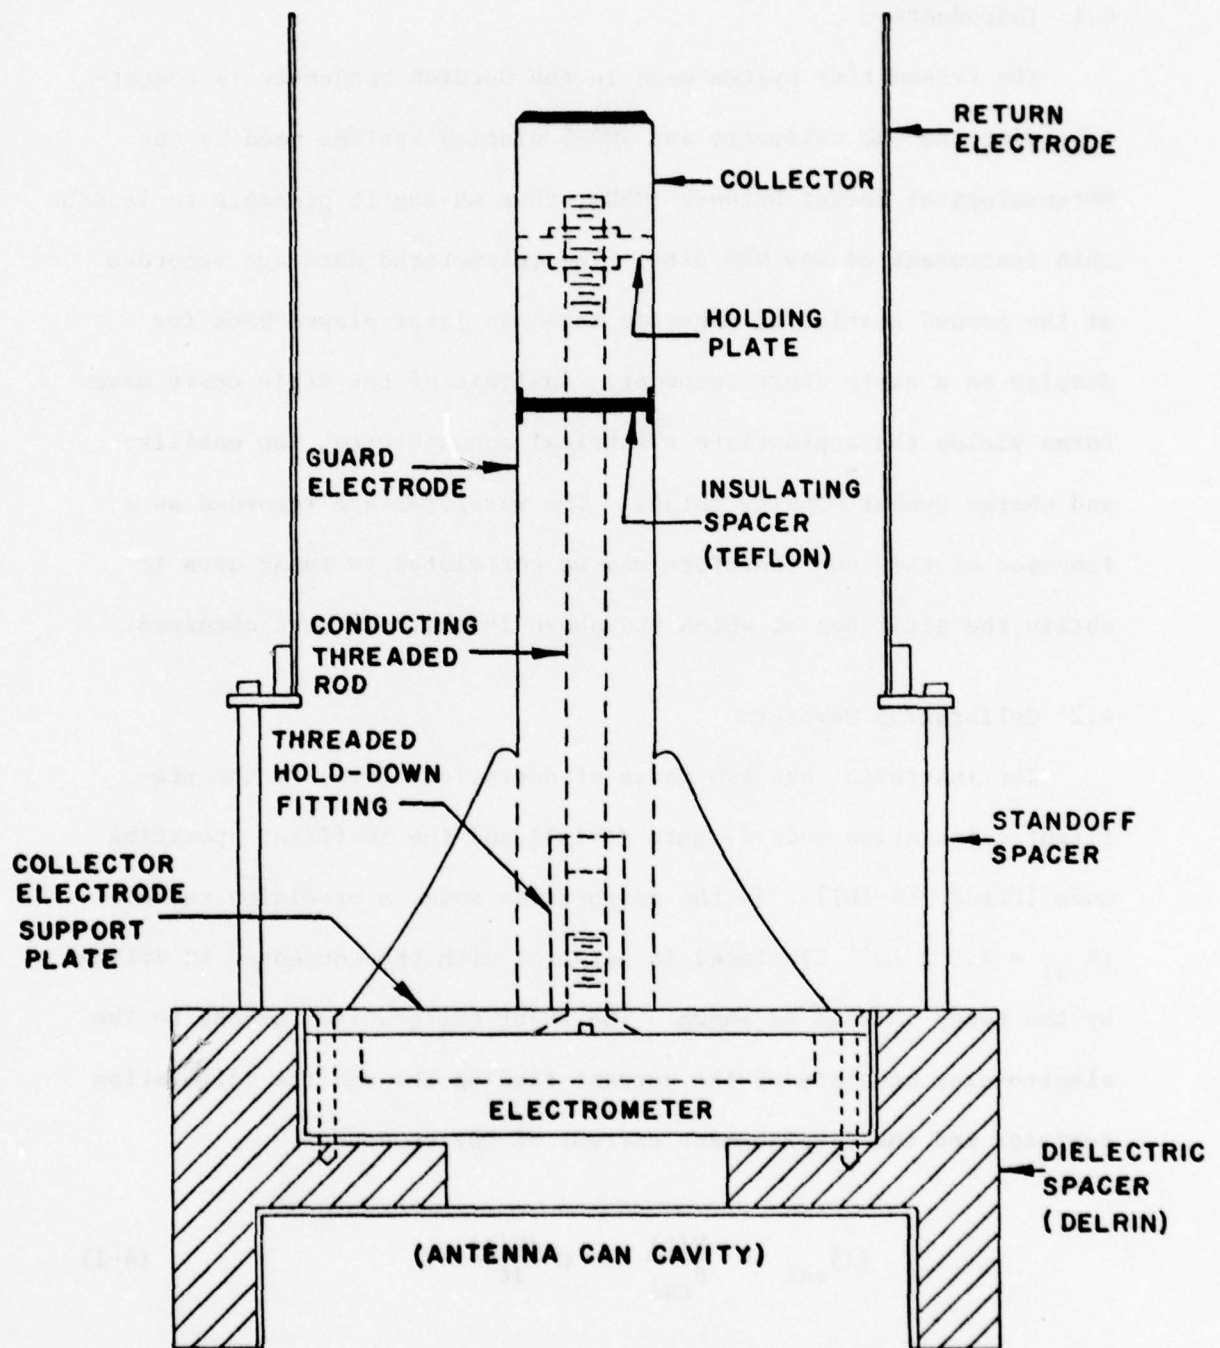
Gerdien Condenser Collector Assembly
